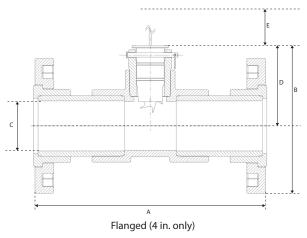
A = Overall Length; B = Overall Height; C = Diameter; D = Center of Tube to Top Height; E = Minimum Clearance for Sensor Removal
